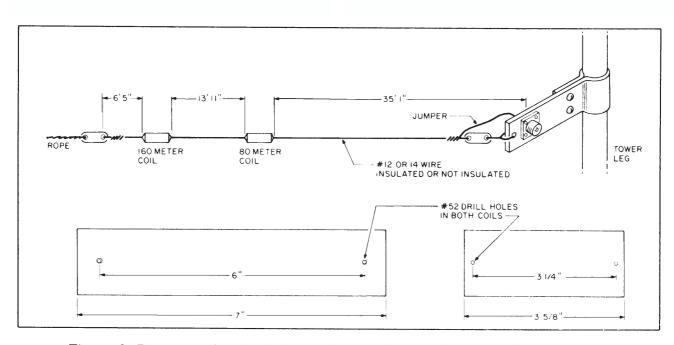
Diagram of the half-sloper showing details of the assembly and coils.
